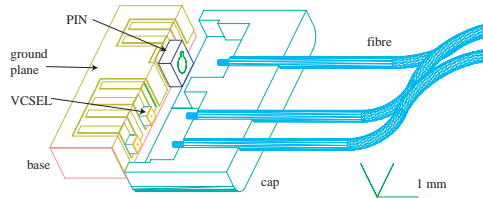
A cut out view of the optical package showing the two VCSELs and one PIN diode mounted on gold pads which are connected to the gold traces.
